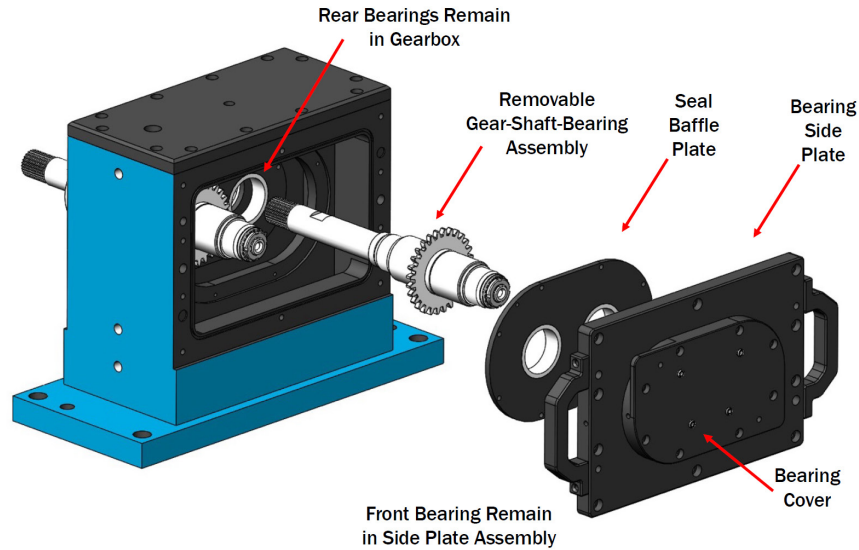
Test gearbox showing removable bearing cover and gear shaft assemblies.
